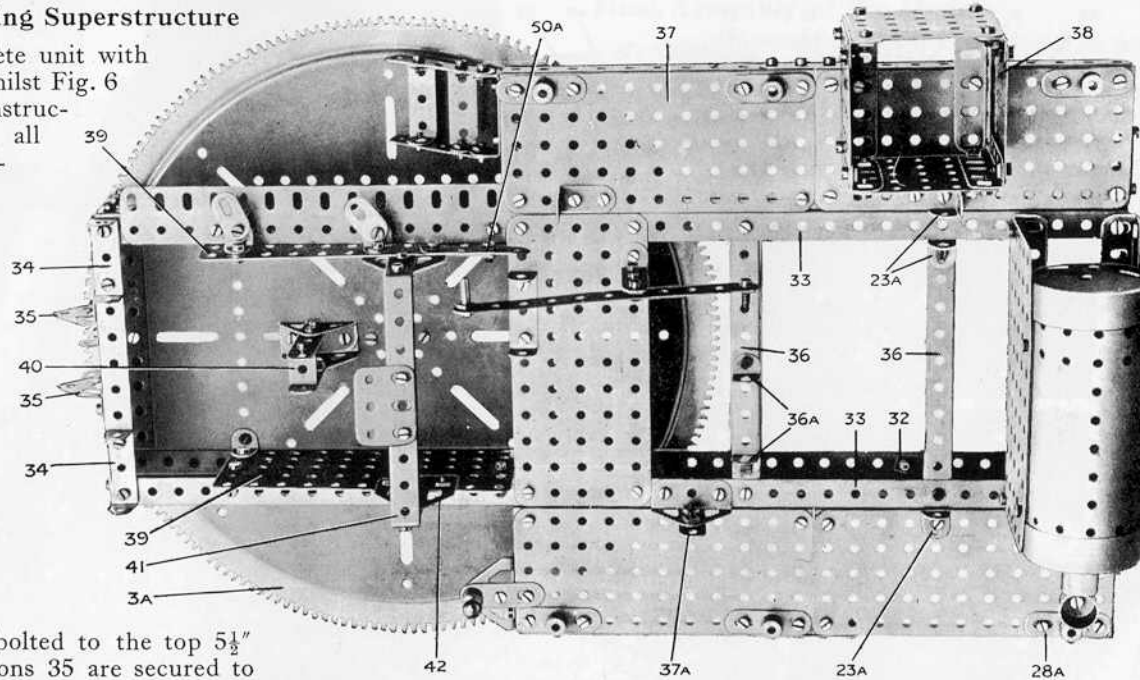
Plan view of the swivelling Superstructure, with Roof and all gears removed.
